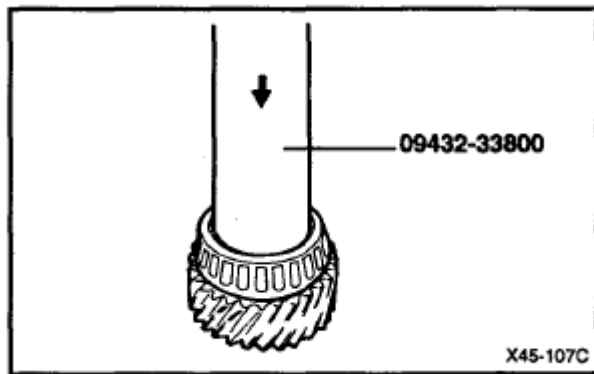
Pressing Bearing Inner Race On To Transfer Shaft
